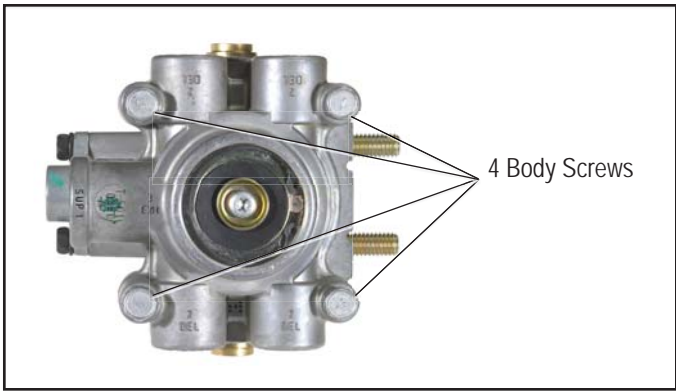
BOTTOM VIEW OF SR-7™ VALVE
